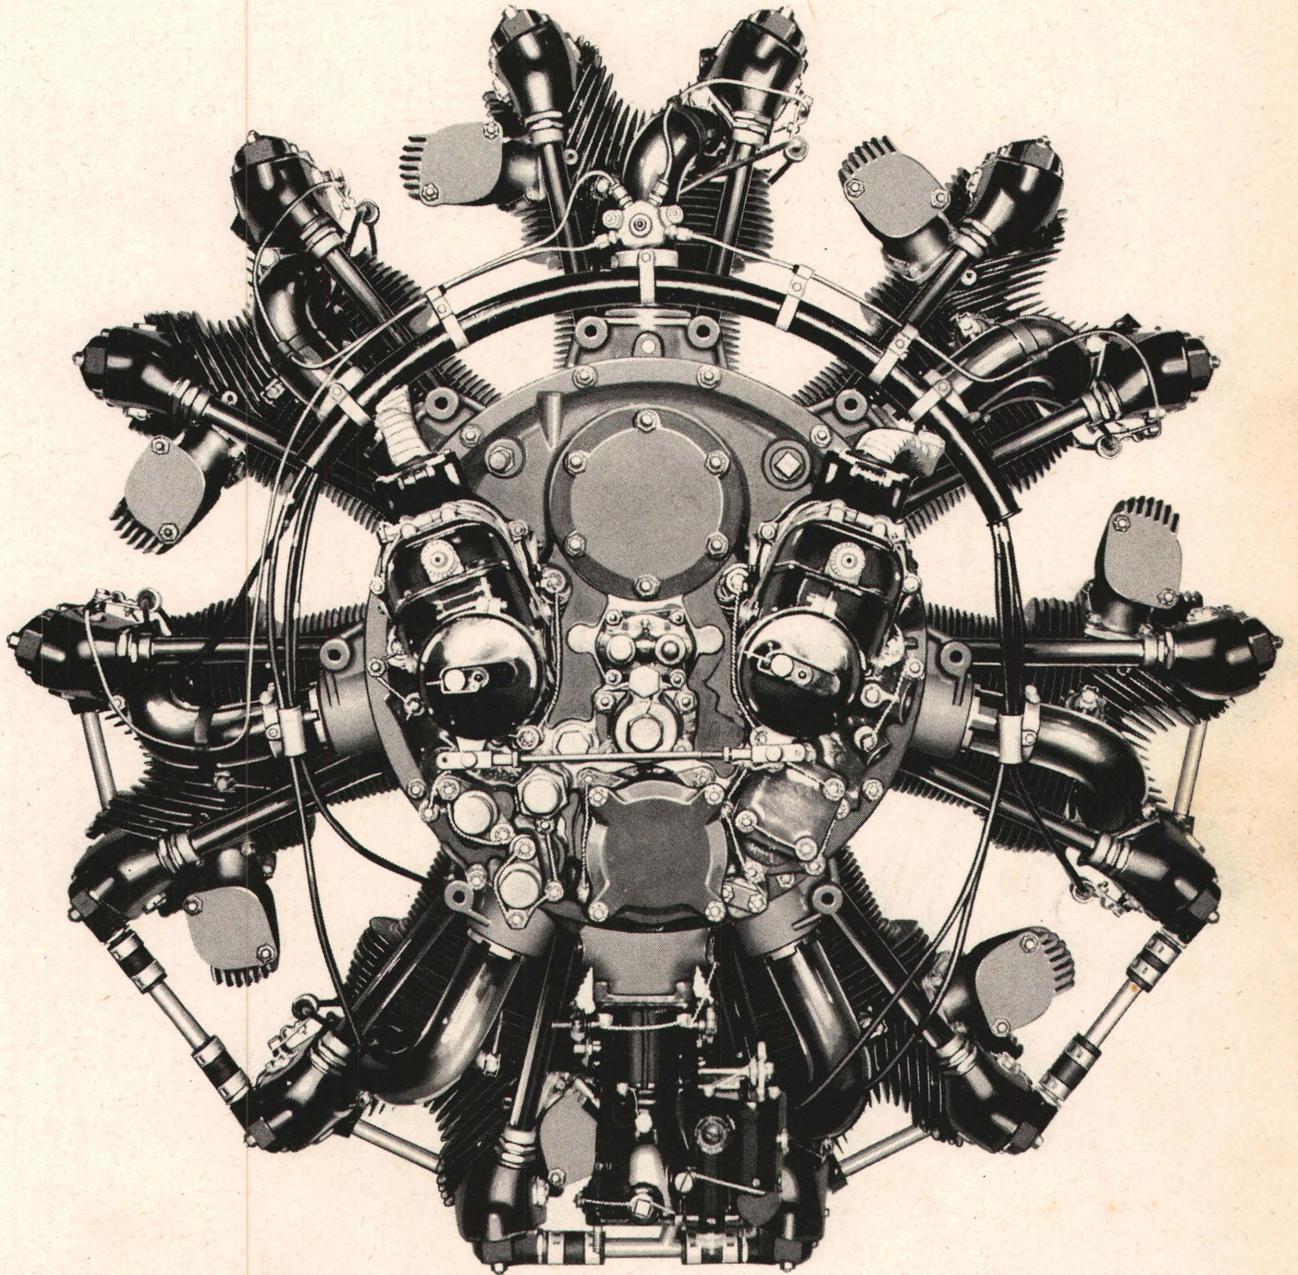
Rear View of R-670-4, -11 and -11A Engines
